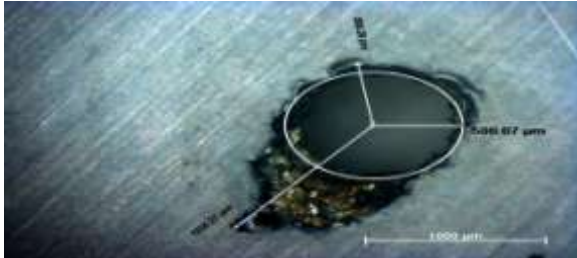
(b) Top side of micro hole using 0.9 mm copper tool
